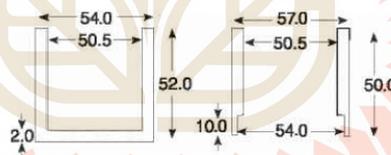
Measuring vessel (left) and cap (right) – Dimensions in mm
